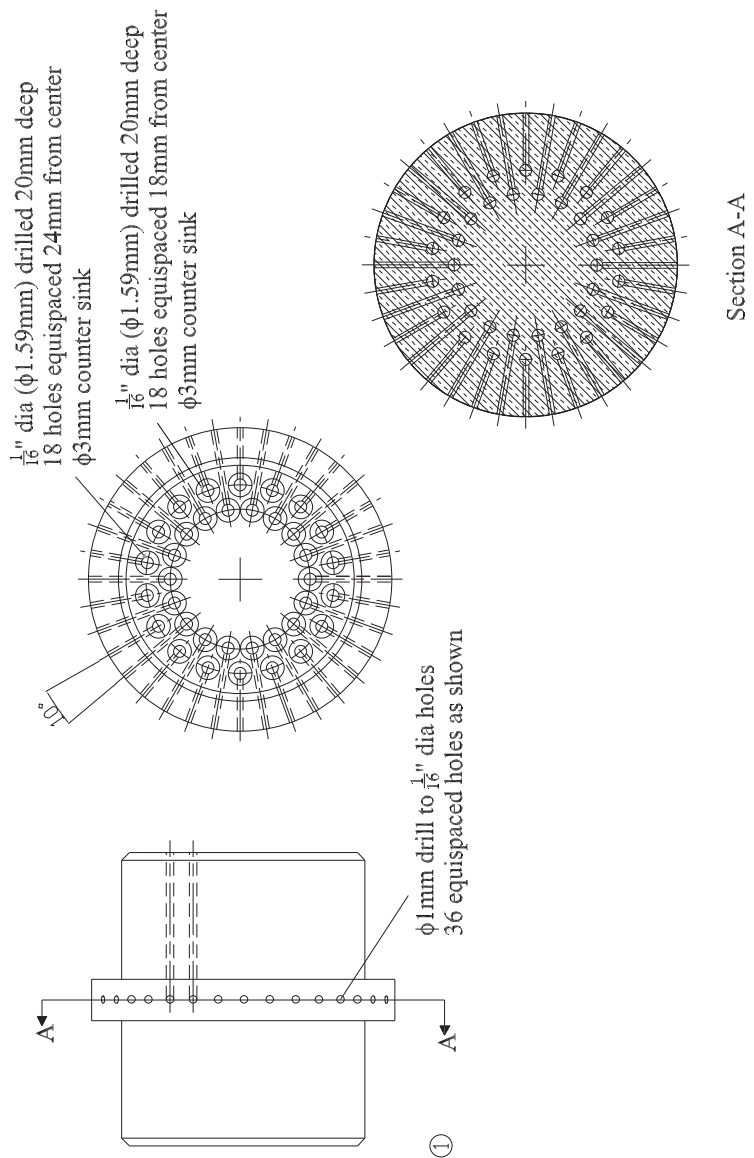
Schematic of the Machined Block(1) - The location of the Pressure Taps on the Tube
